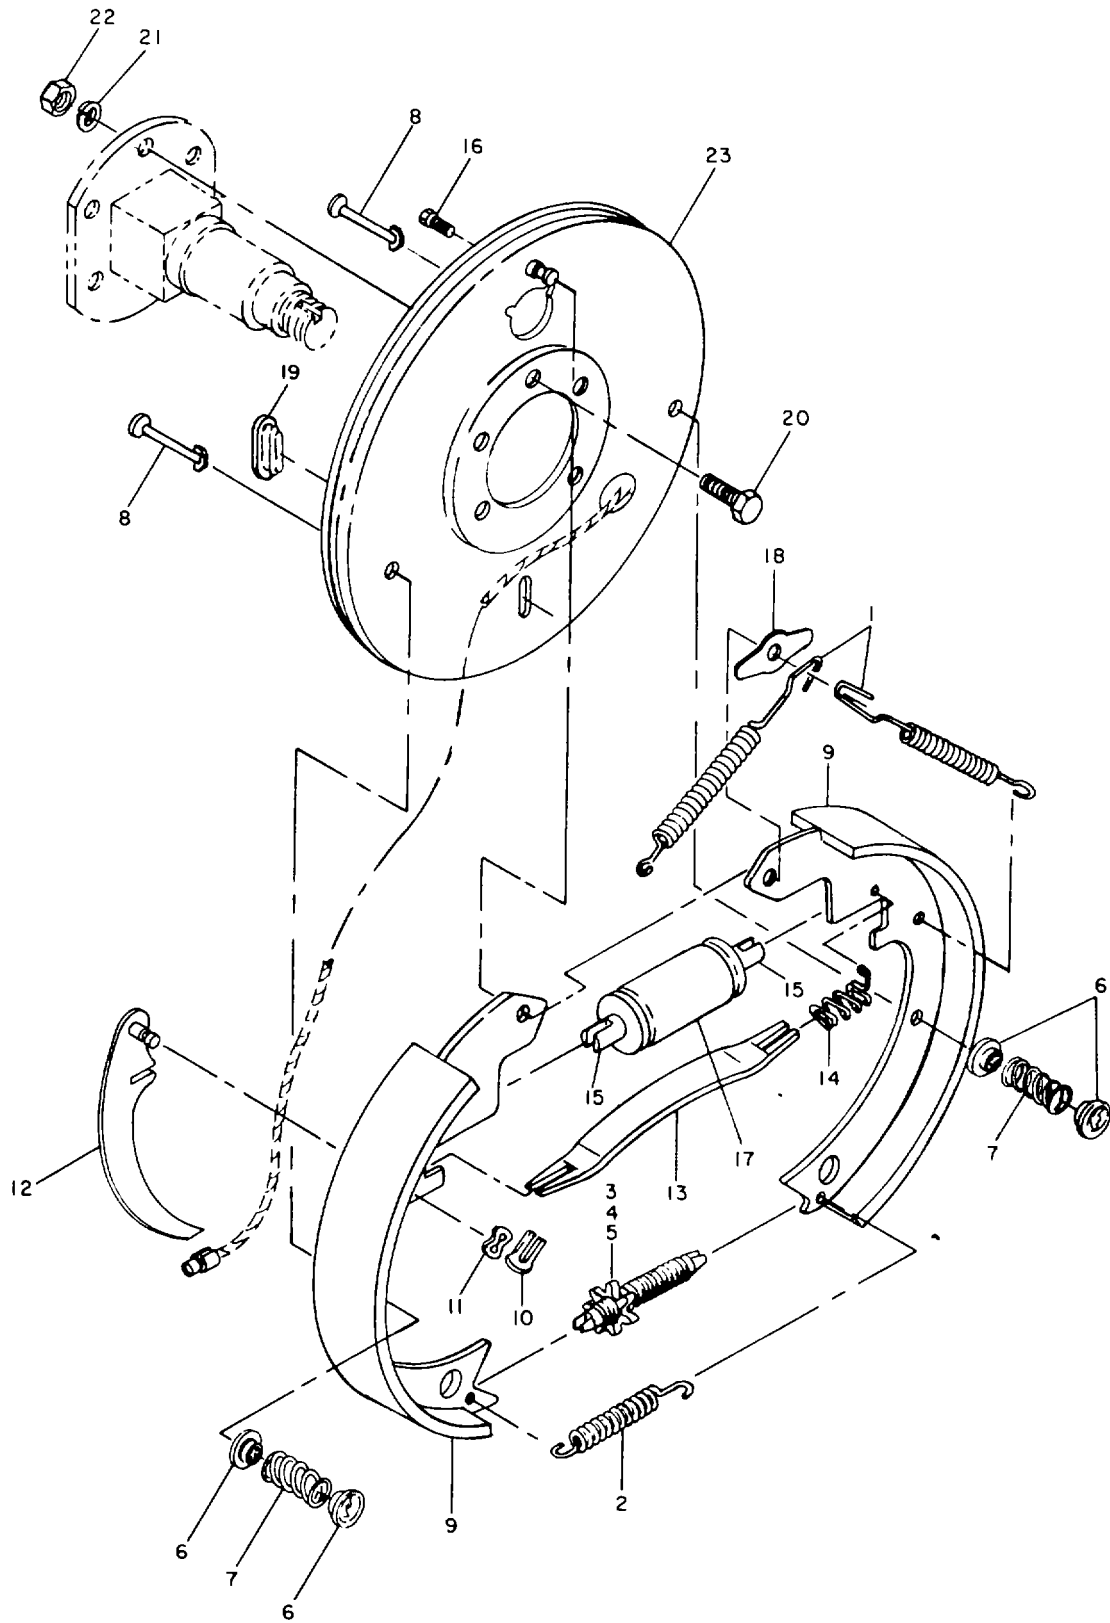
Hydraulic brakes (used on front transporter assembly only)
